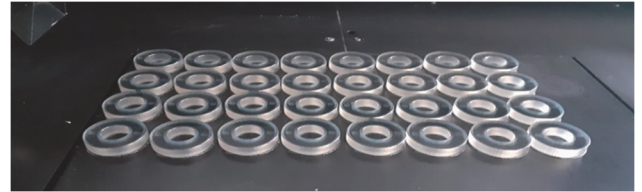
Locating samples on the 3D printer platform Connex 350, Stratasys
